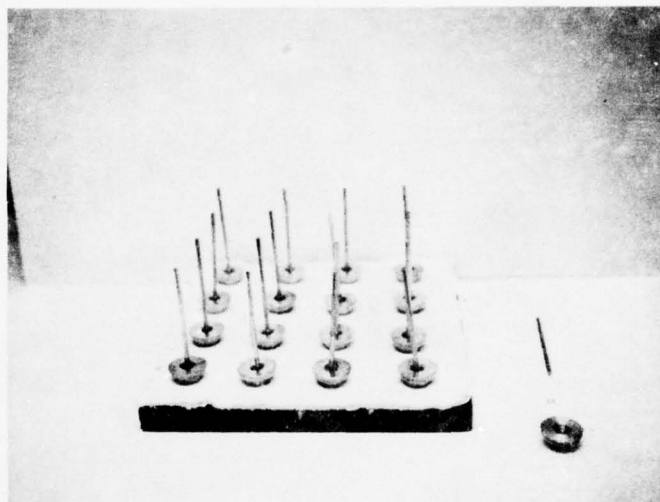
Exhaust Tube Brazing Fixture: The copper exhaust tubes are self-fixturing in the holes of the end caps as shown. The Fiberfrax sheet permits a short length of the exhaust tube to extend through the end cap for added support.
